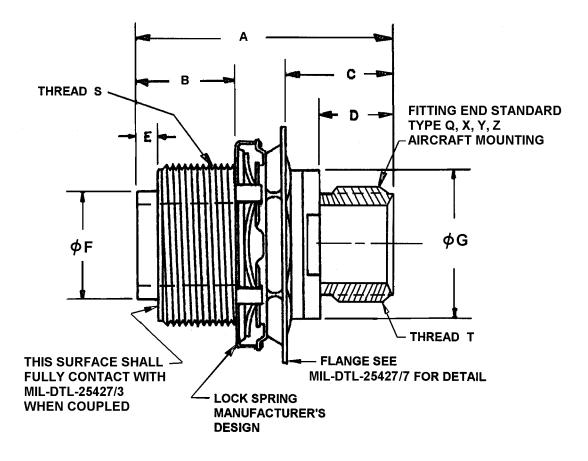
Coupling half aircraft mounting dimensions and configuration.
